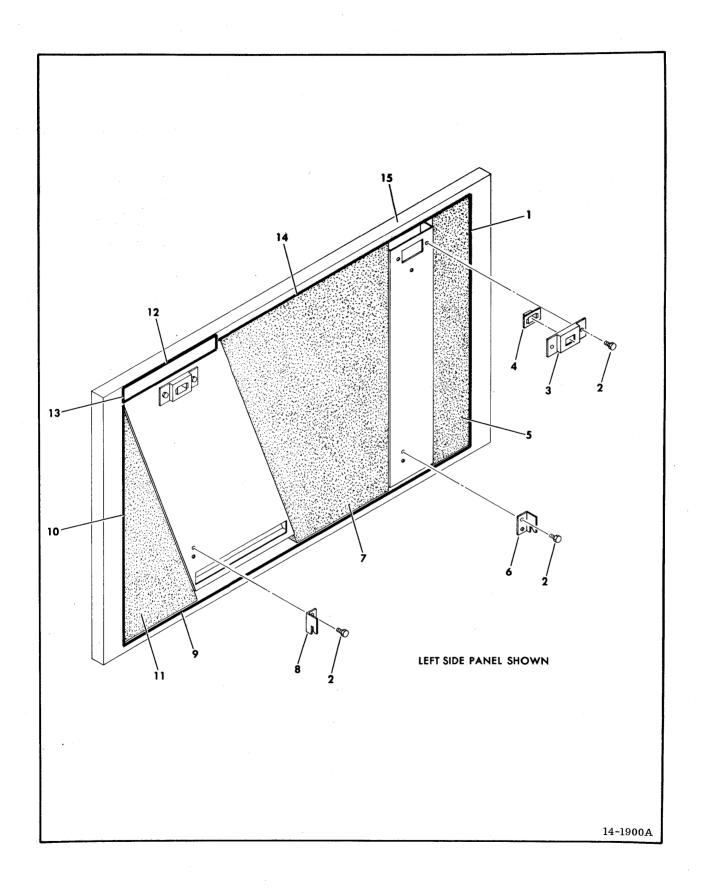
Side Panel Assembly - Acoustic 83322150 W
